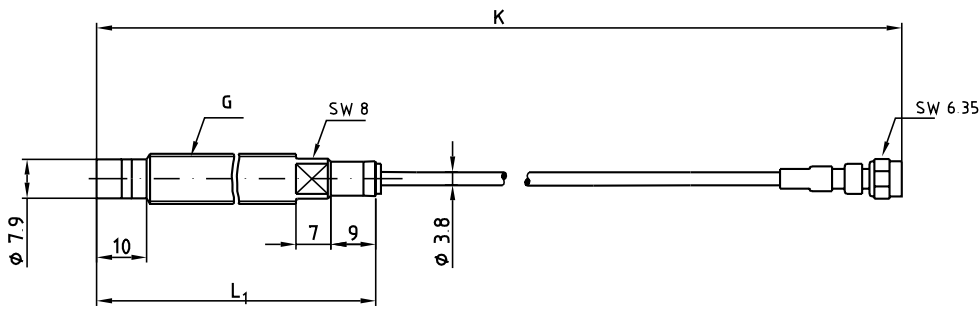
Displacement sensor DS-1051 with full length thread; fig. without cable protection
